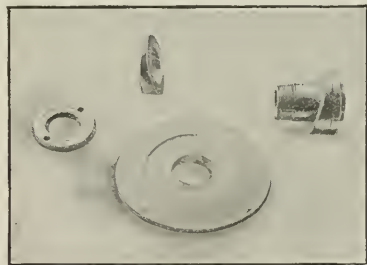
PARTS OF THE PHANTOM GRINDING WHEEL
